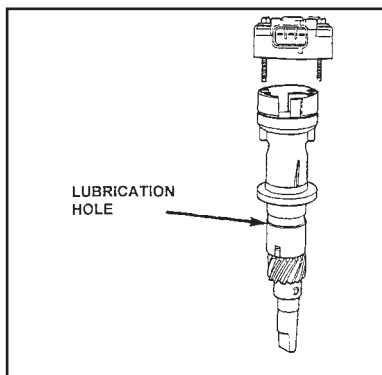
Remember to lubricate the shaft before installing camshaft sensor assembly on Chrysler/Jeep 4.0L engines.
